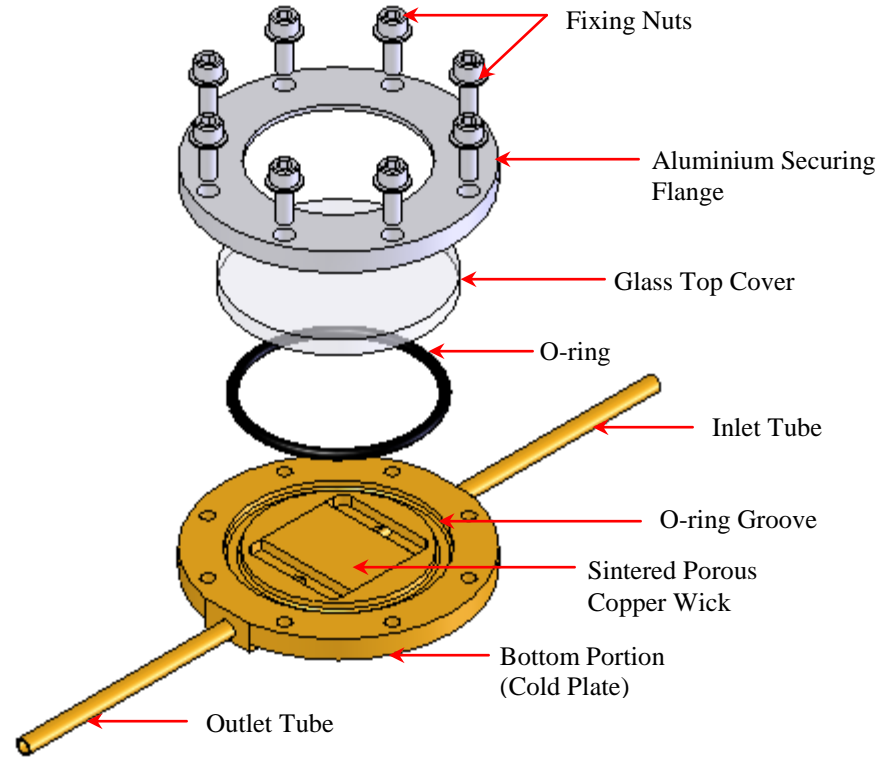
Exploded View of the Sintered Porous Heat Sink
